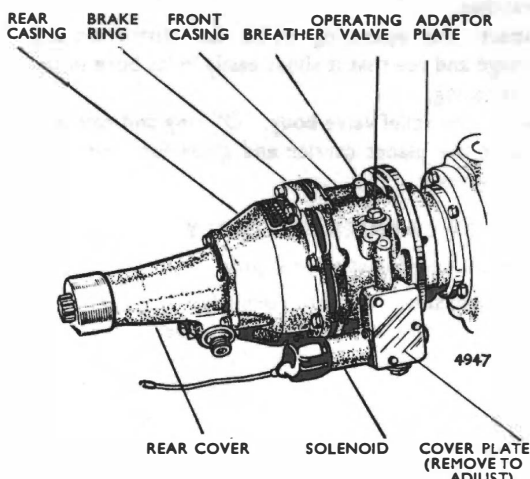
Side view of unit (Later units have an external balance pipe and a plug replaces the breather)
